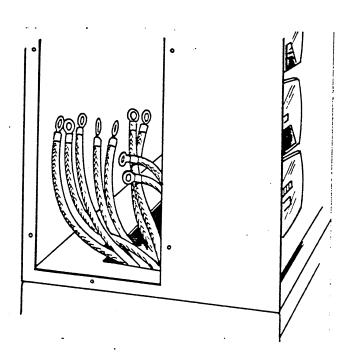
CONTROL BOX (SIDE PANEL REMOVED)
